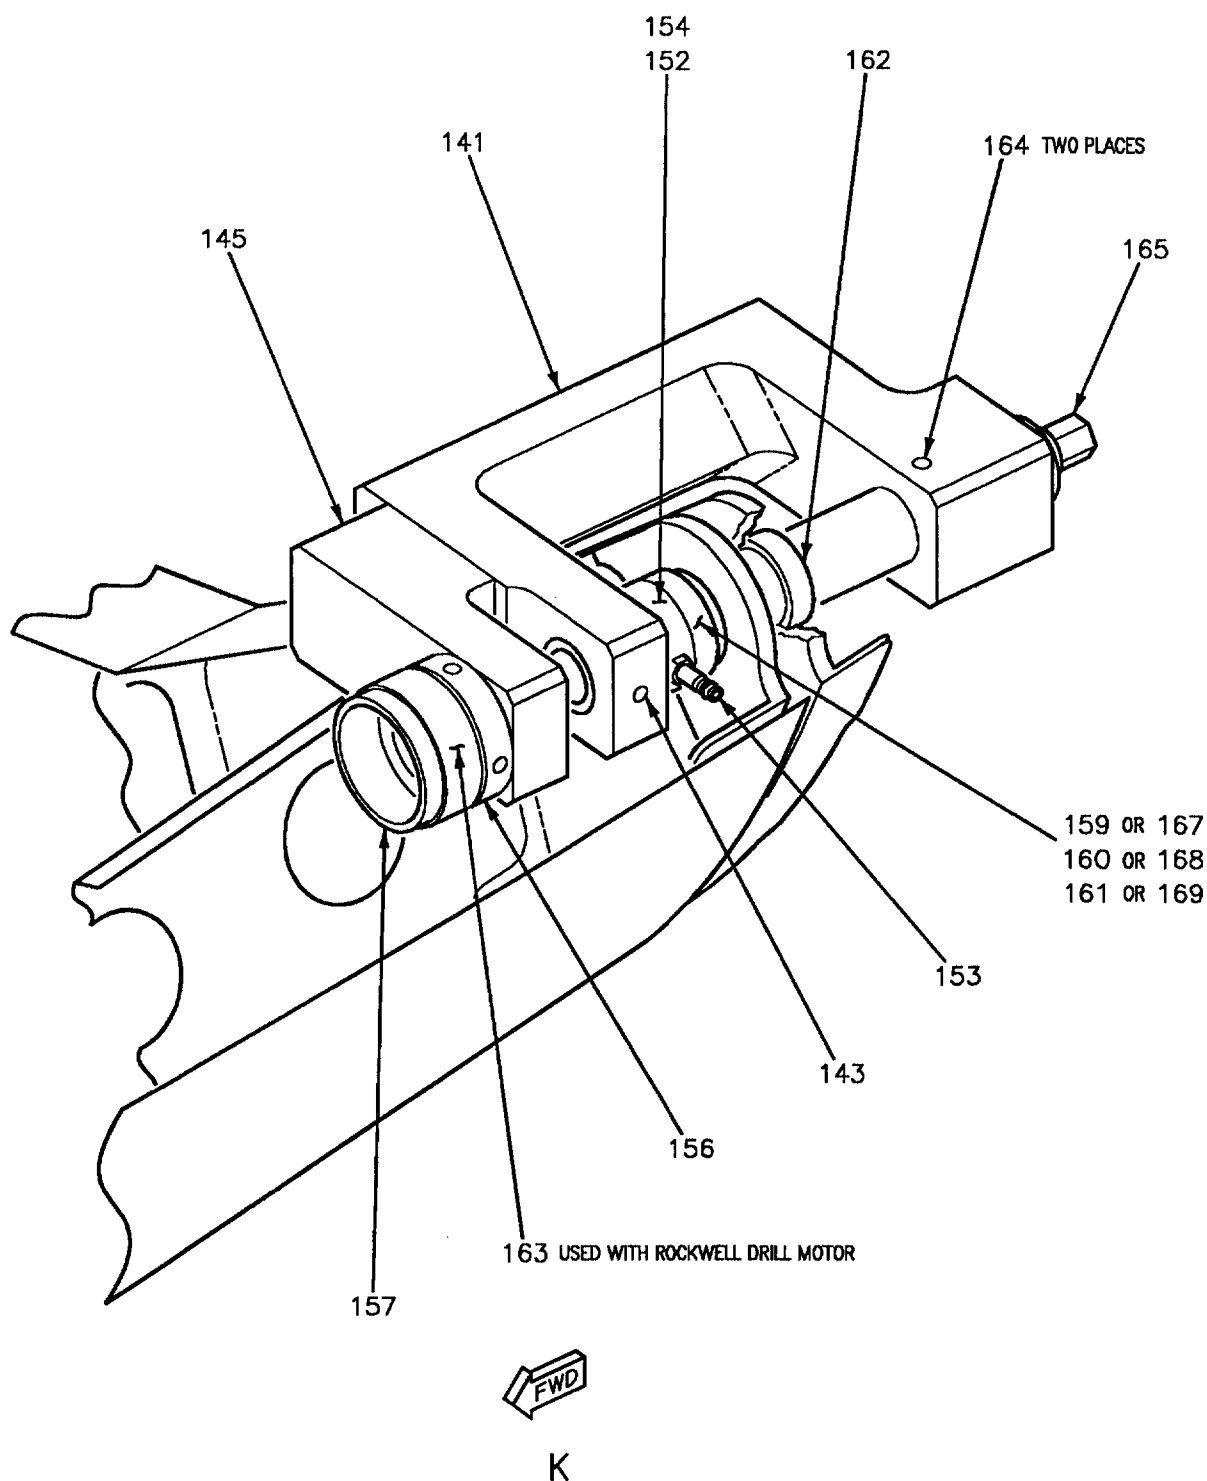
Bushing Removal, Installation, Drilling And Reaming (Sheet 4)
